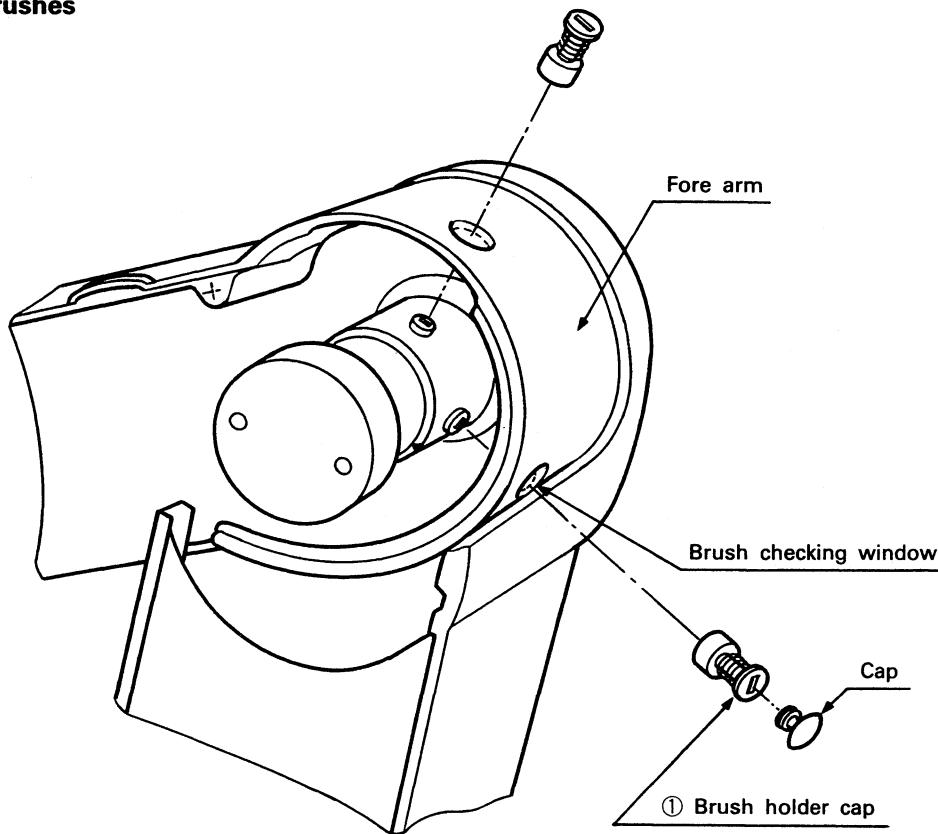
Checking and Changing the Elbow Drive Motor Brushes
